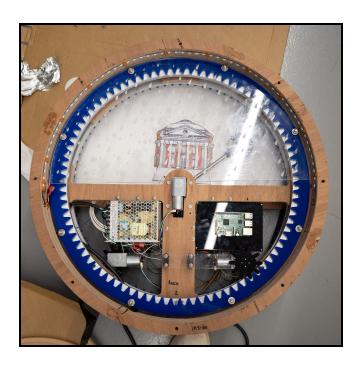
A view from the front showing the full assembly prior to gluing the front face to the front three rings
